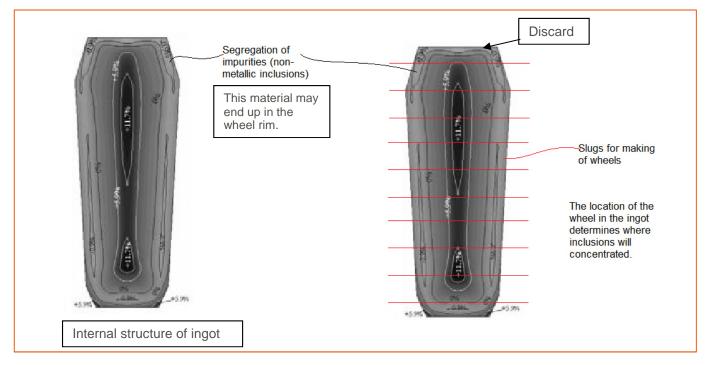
Schematic of steel slugs for wheel forgings taken from ingot feedstock.
